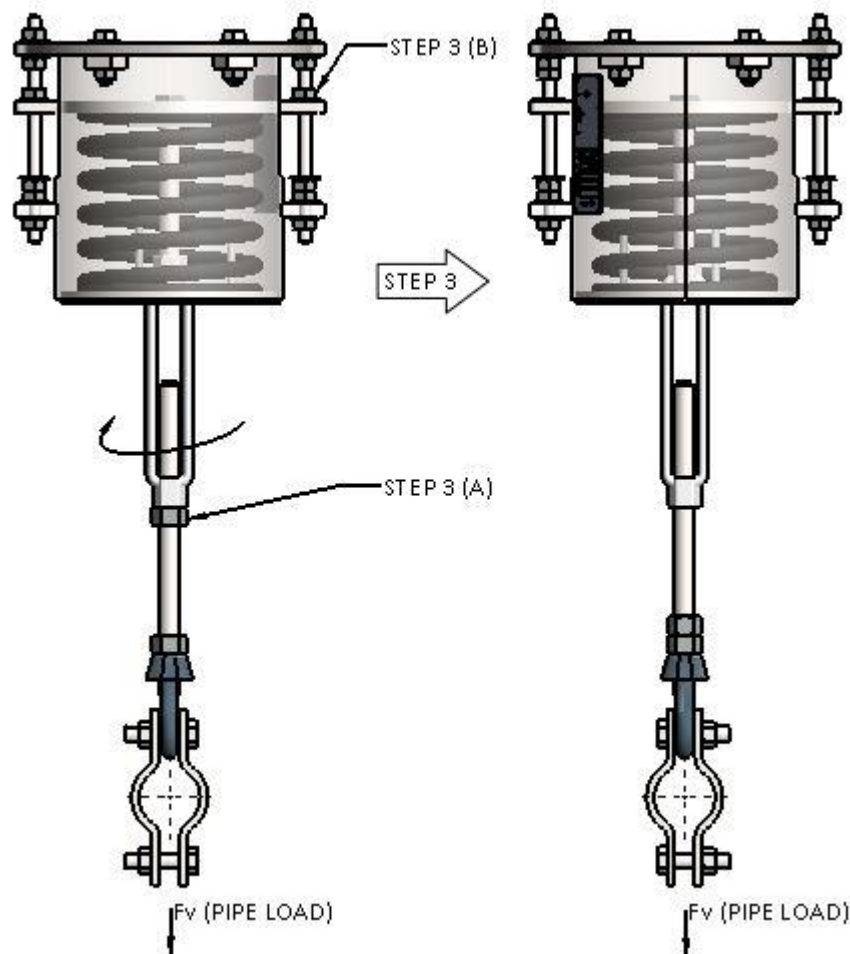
View of a Type A, B & C assembly with Multi-locks
